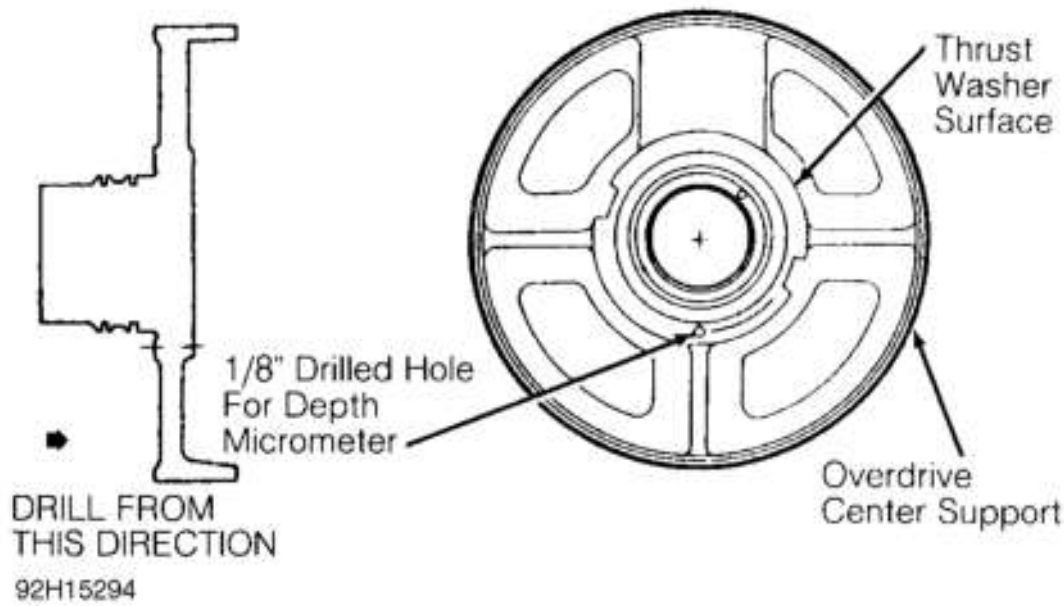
Drilling Fabricated Depth Gauge Fixture
